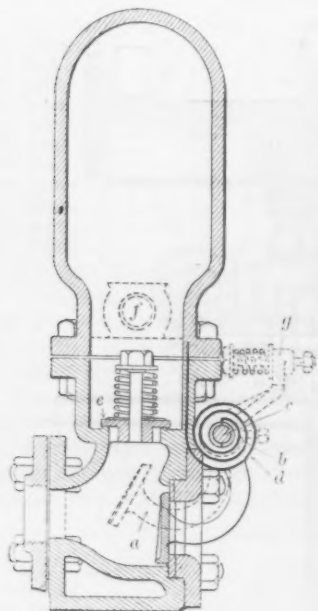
Vertical Section of the Columbia Hydraulic Ram.
